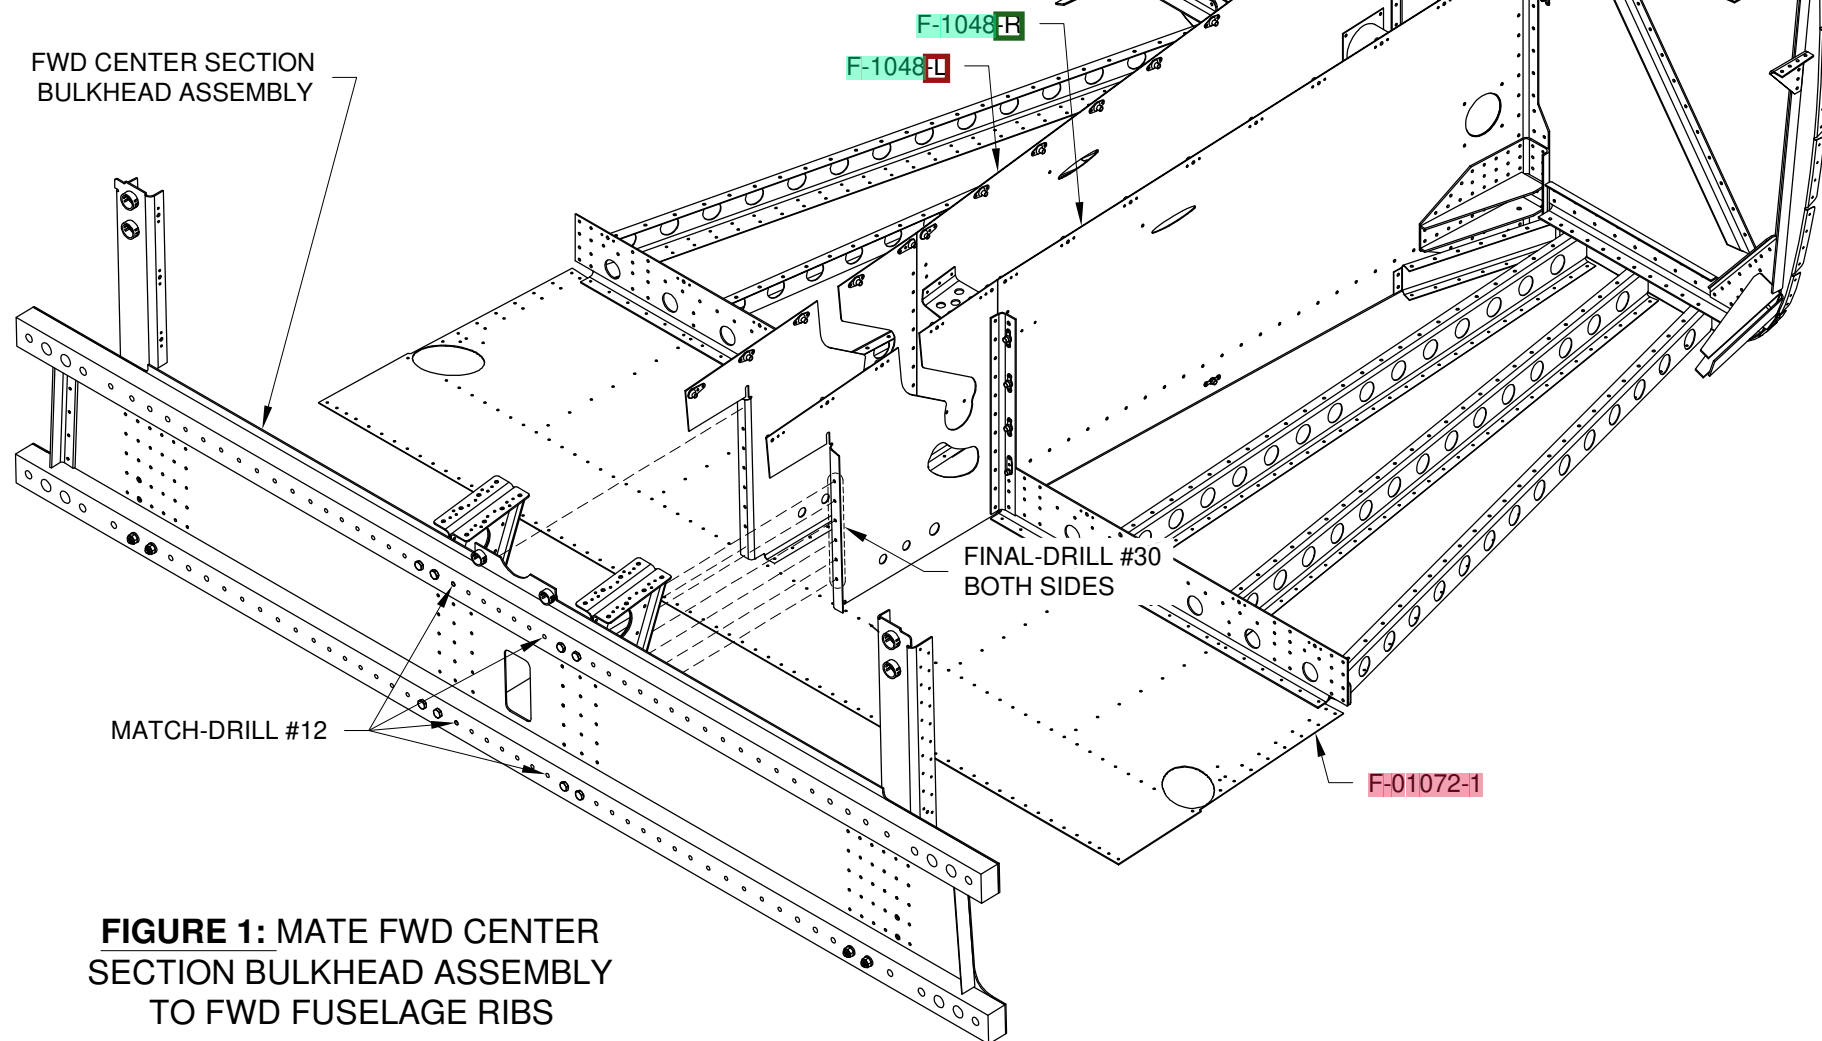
MATE FWD CENTER SECTION BULKHEAD ASSEMBLY TO FWD FUSELAGE RIBS
